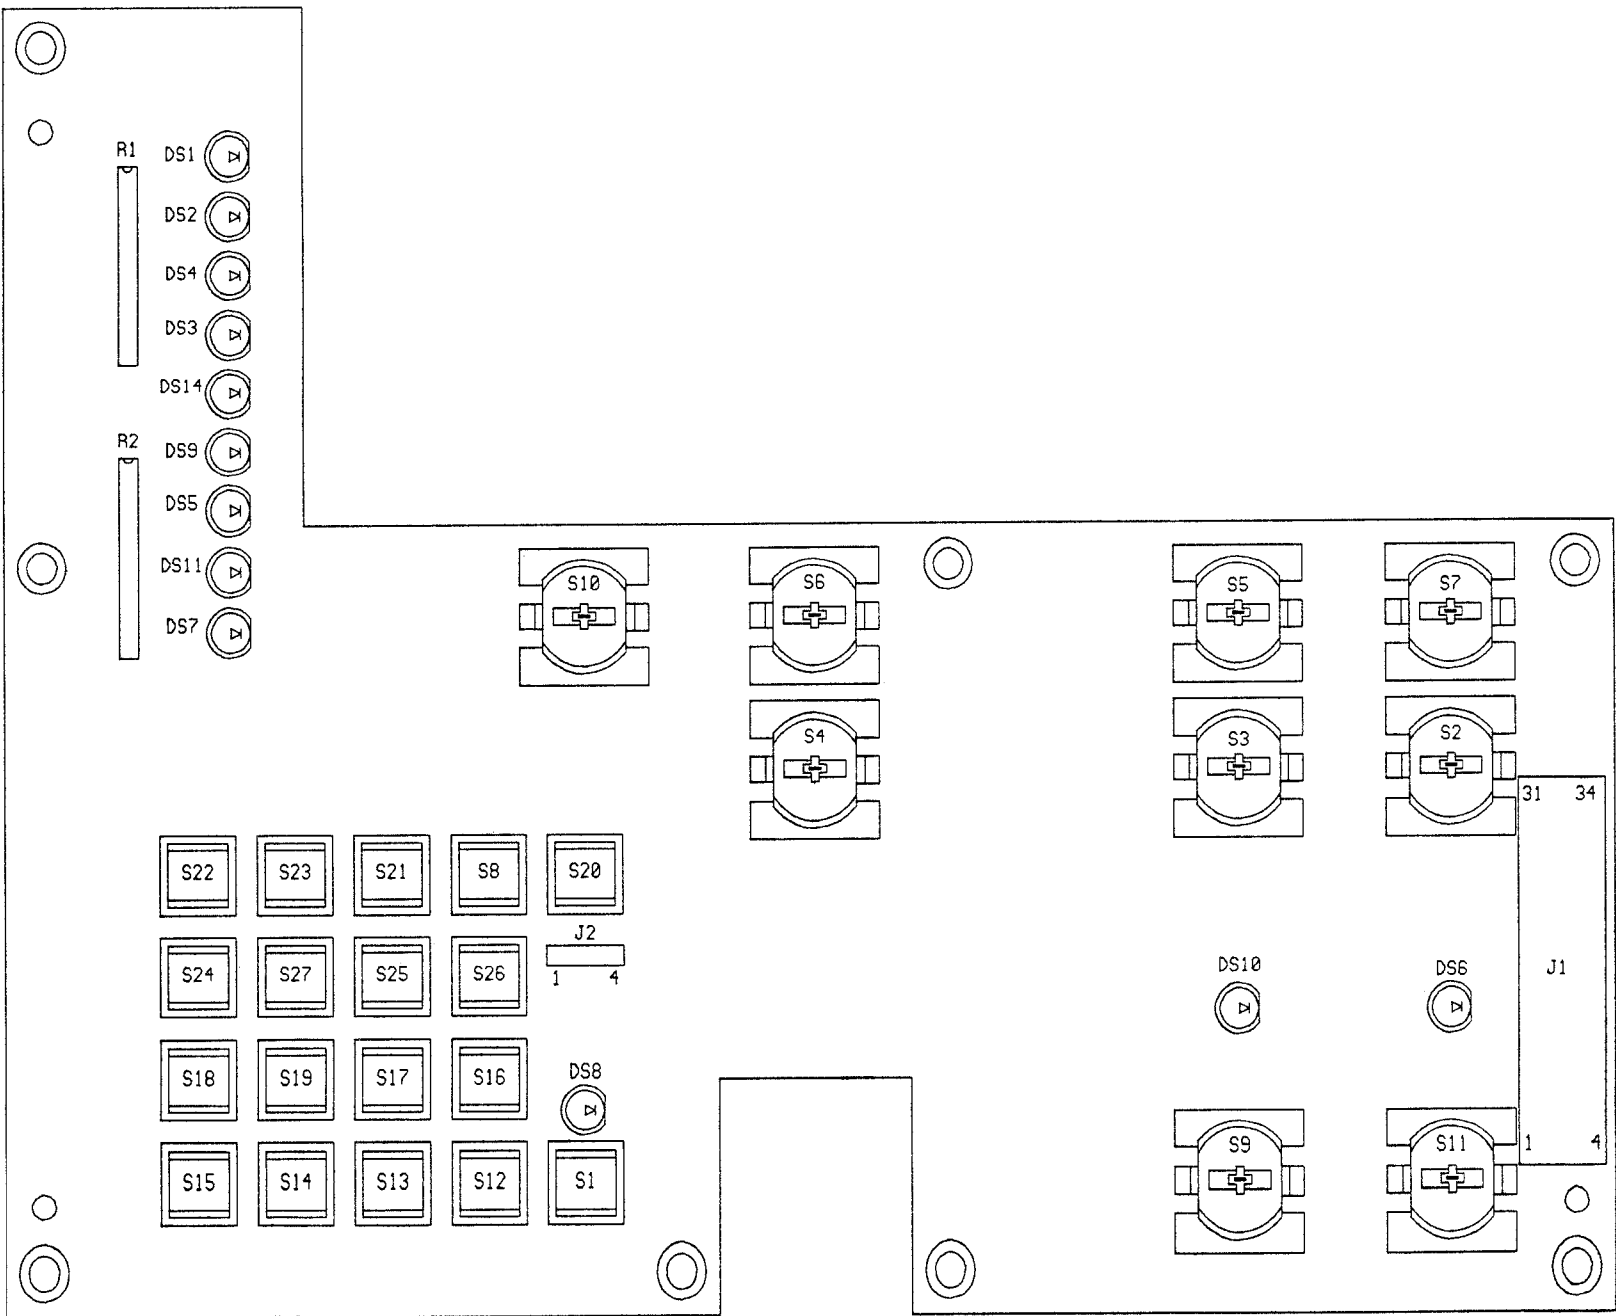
Front Panel Switch PWB Assembly, A11A2 (10133-1840, Rev. B)
